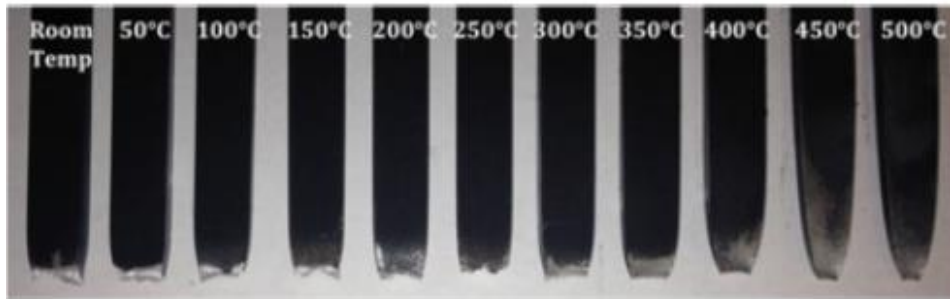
6061-T651 alloy tensile specimen fracture morphology [Summers et. al., 2015]
